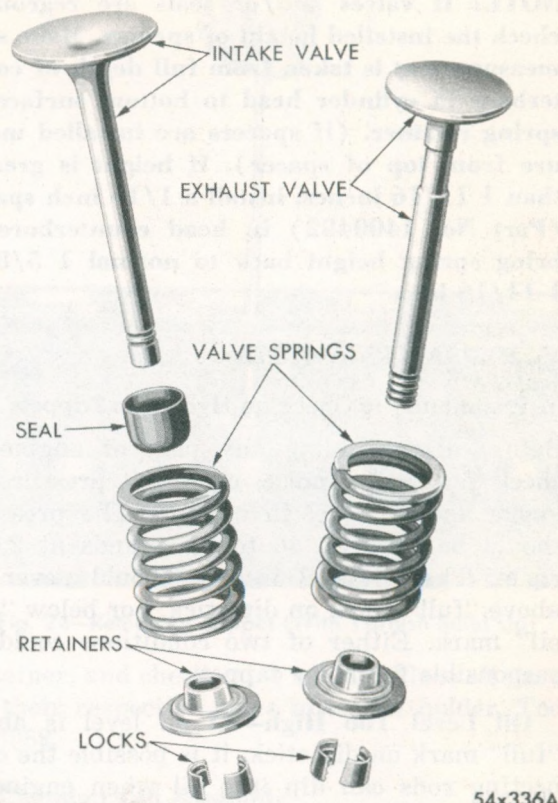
Valves, Springs, Seals, Retainers and Locks (Disassembled View)
